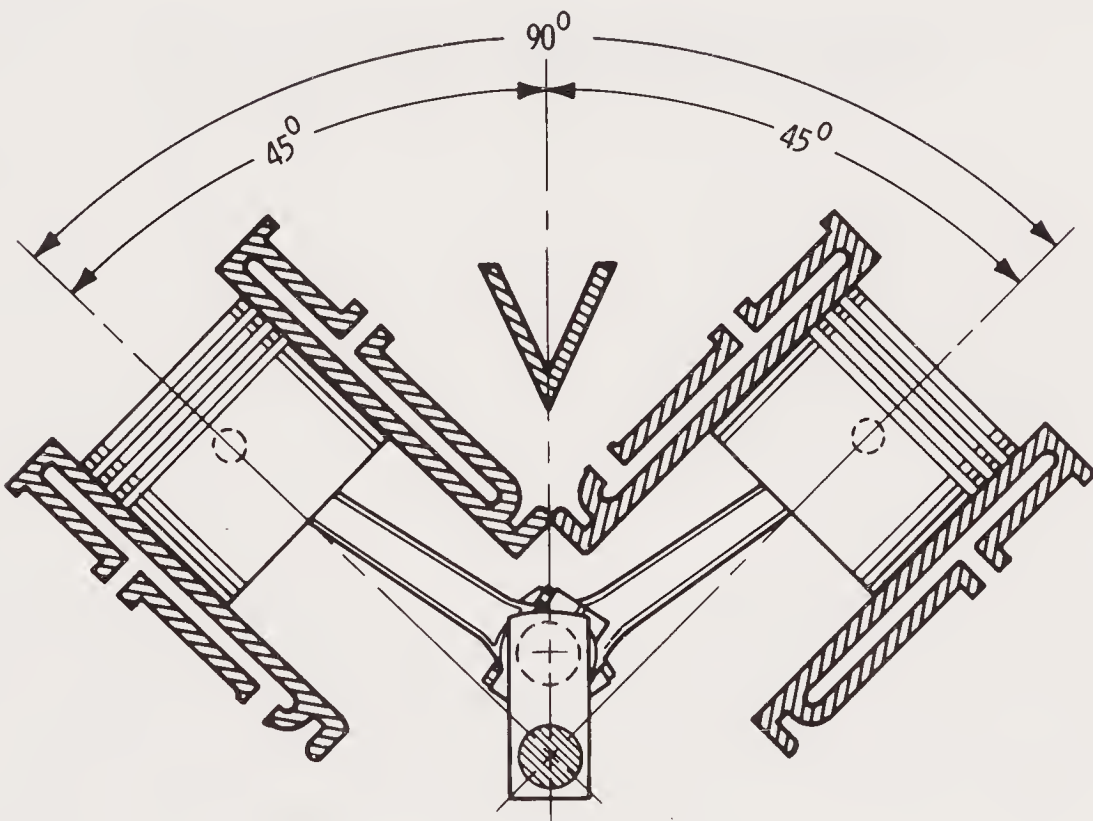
Angular arrangement of cylinders on a V-8 engine.
